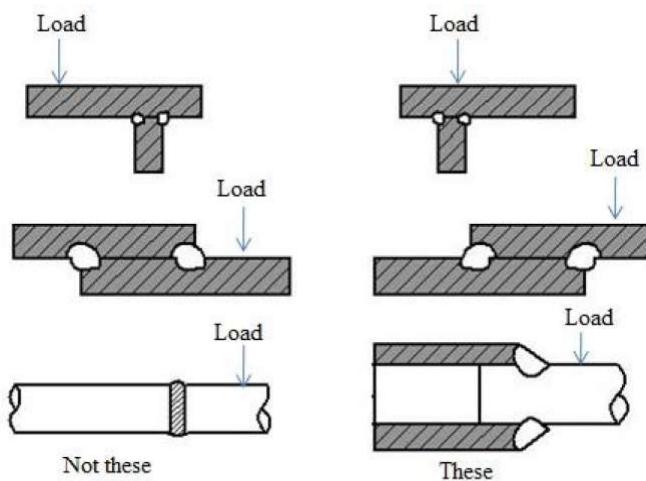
Design of weldments to minimize stress concentration in the weld fillet
